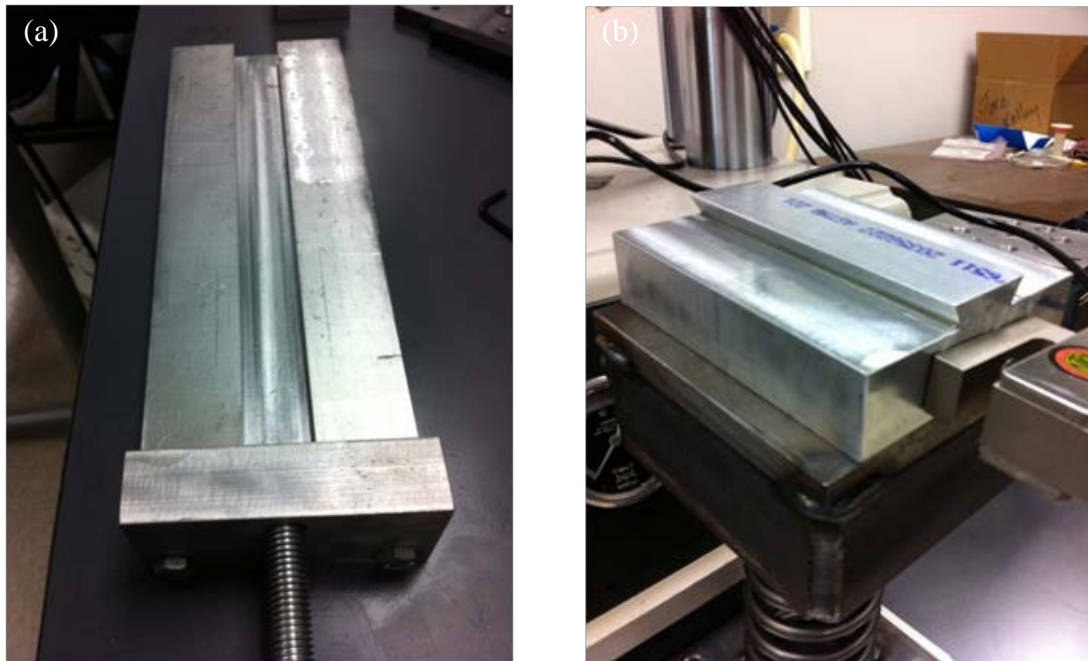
(a) Dovetail Base (b) Dovetail Slide mounted to spring (Dimensioned drawings in Appendix K)
